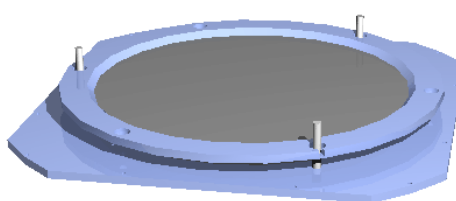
Assembly of MCP-stack - Stage 3-1 (DLD120 and HEX120)
